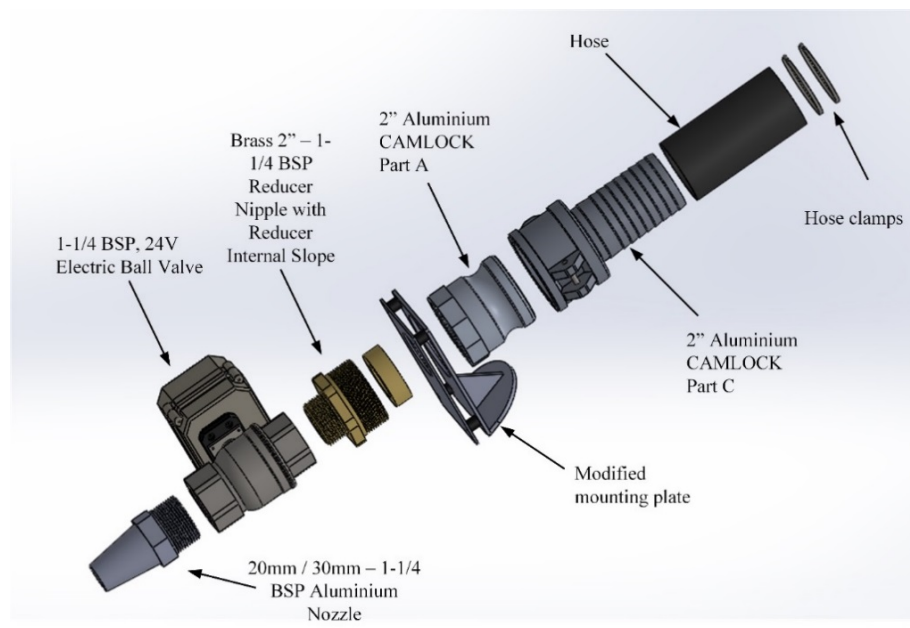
27: Exploded view of the extruder assembly that is connected to the progressive cavity pump and is attached to the end of the robot.
